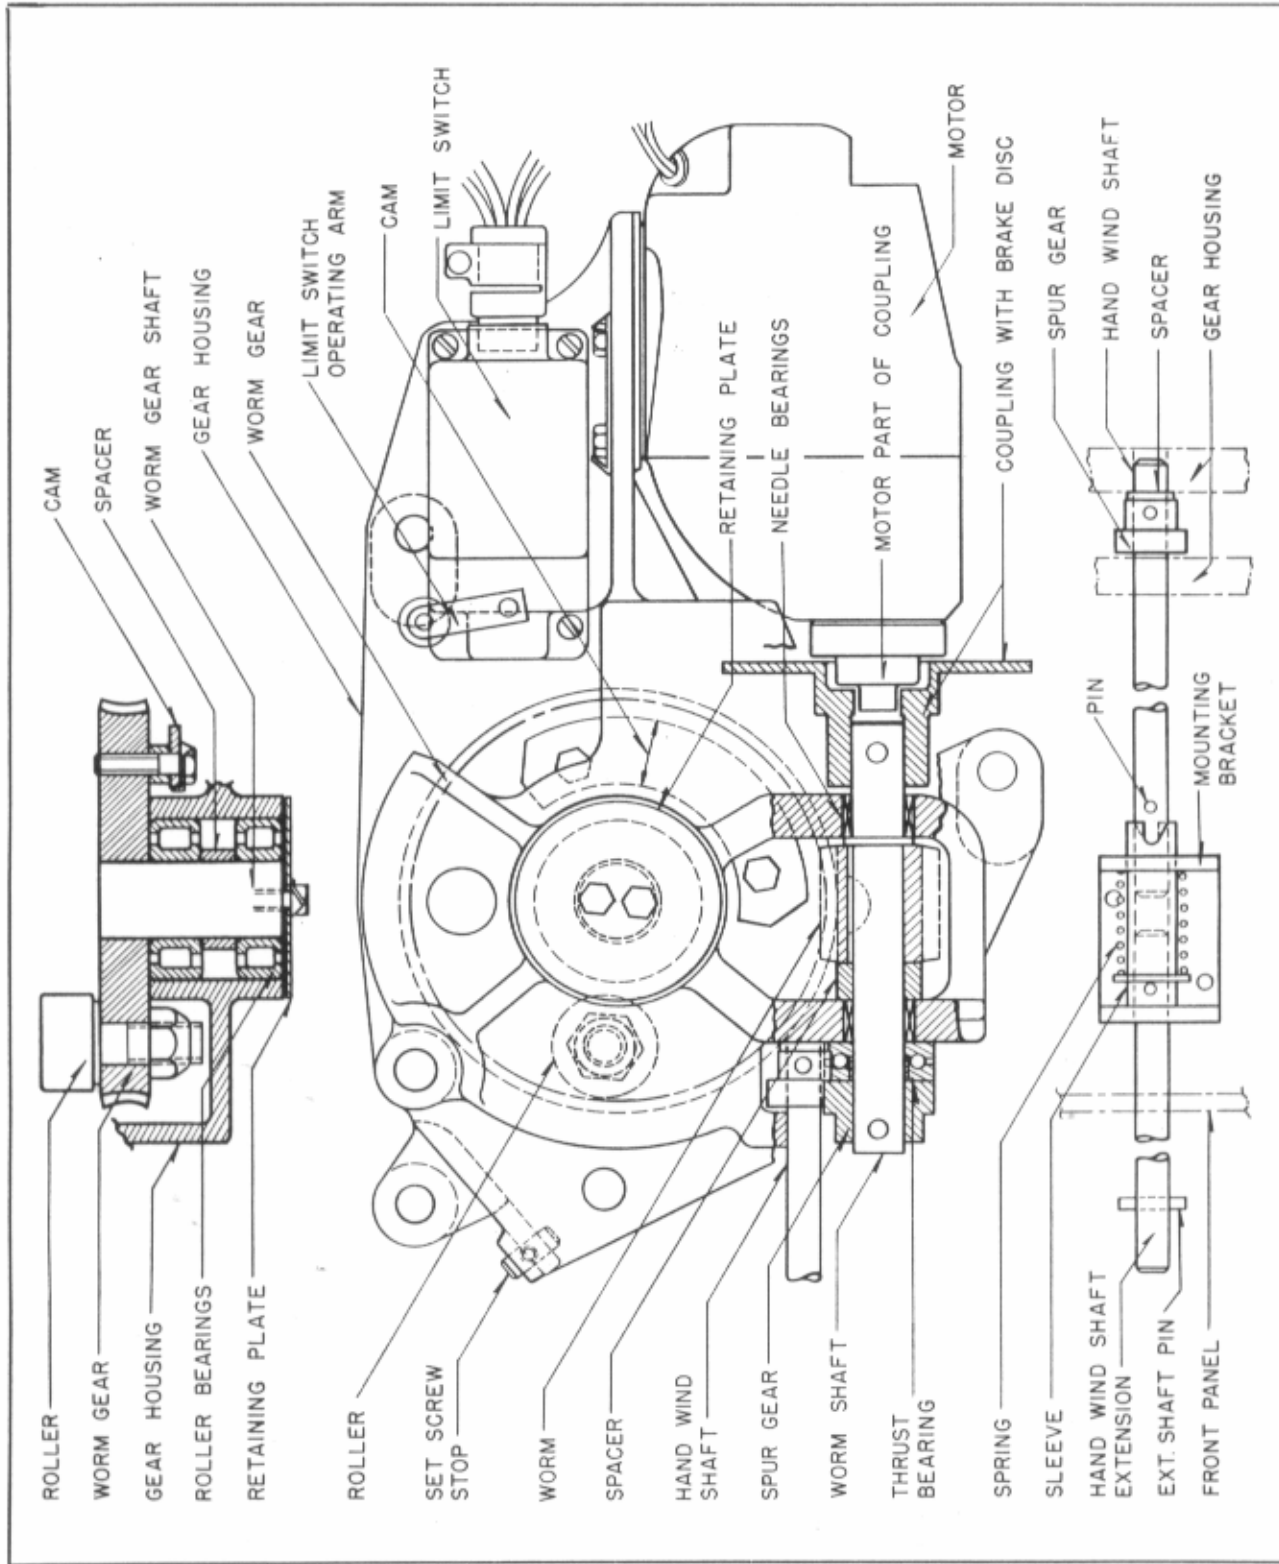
General Disposition of Gear Housing and Gear Drive, of Stored Energy (Spring) Closing Mechanism
